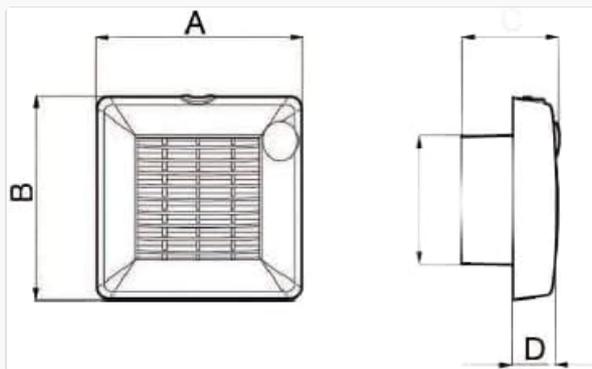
Technical drawing illustrating the dimensions (A, B, C, D) of the Vortice M 150/6" A 30 W fan for installation planning.
